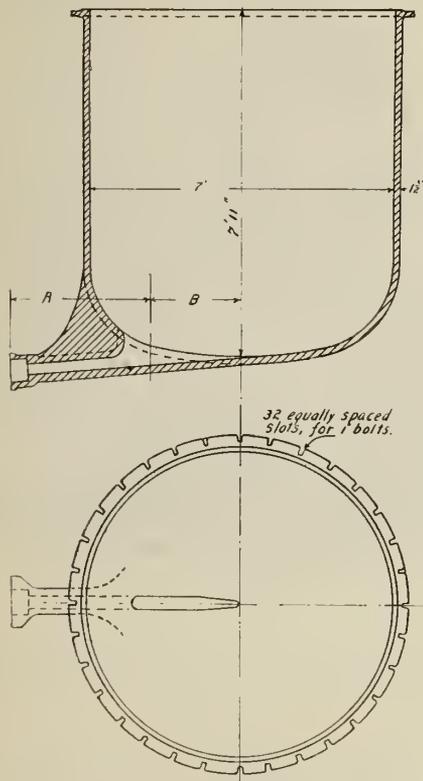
PLAN AND SECTIONAL ELEVATION OF CAST IRON STILL.
